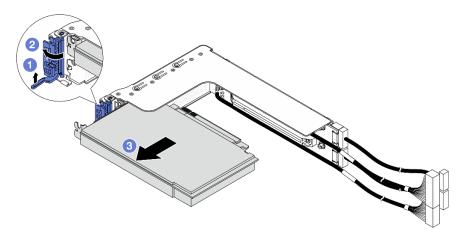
Removing a PCIe adapter from the 2FH riser cage
